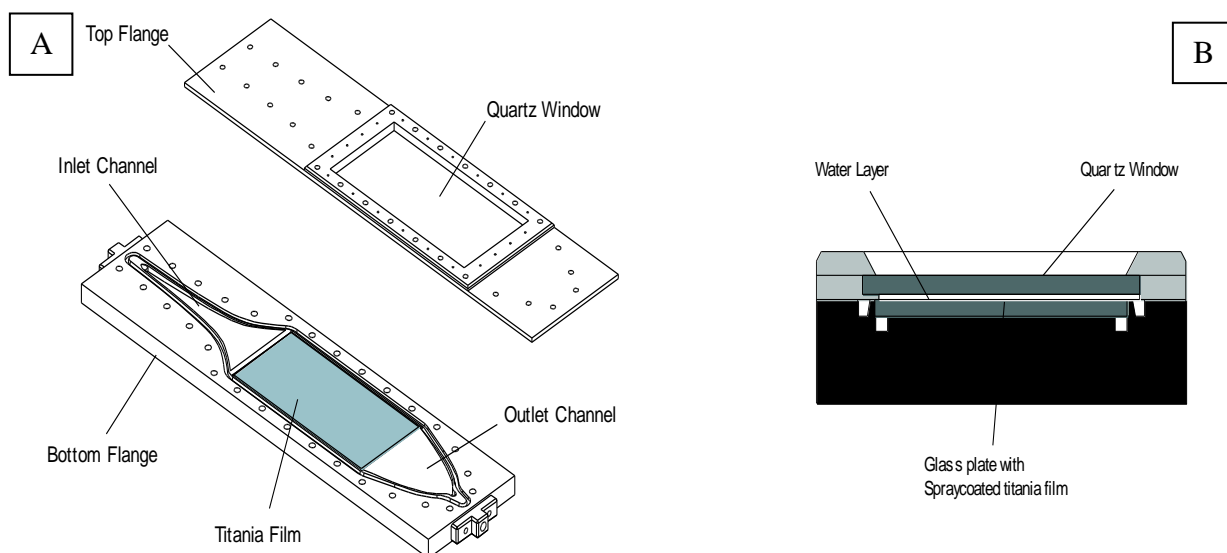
Reactor components and dimensions (mm) of the flat plate reactor.
